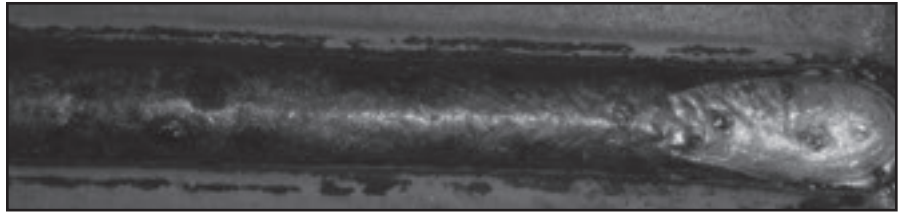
Uniform weld bead example.  $WFS_1 = 550 \text{ in./min}$ ,  $V_1 = 36 \text{ V}$ ,  $WFS_2 = 400 \text{ in./min}$ ,  $V_2 = 39 \text{ V}$ ,  $TS = 25 \text{ in./min}$ .
